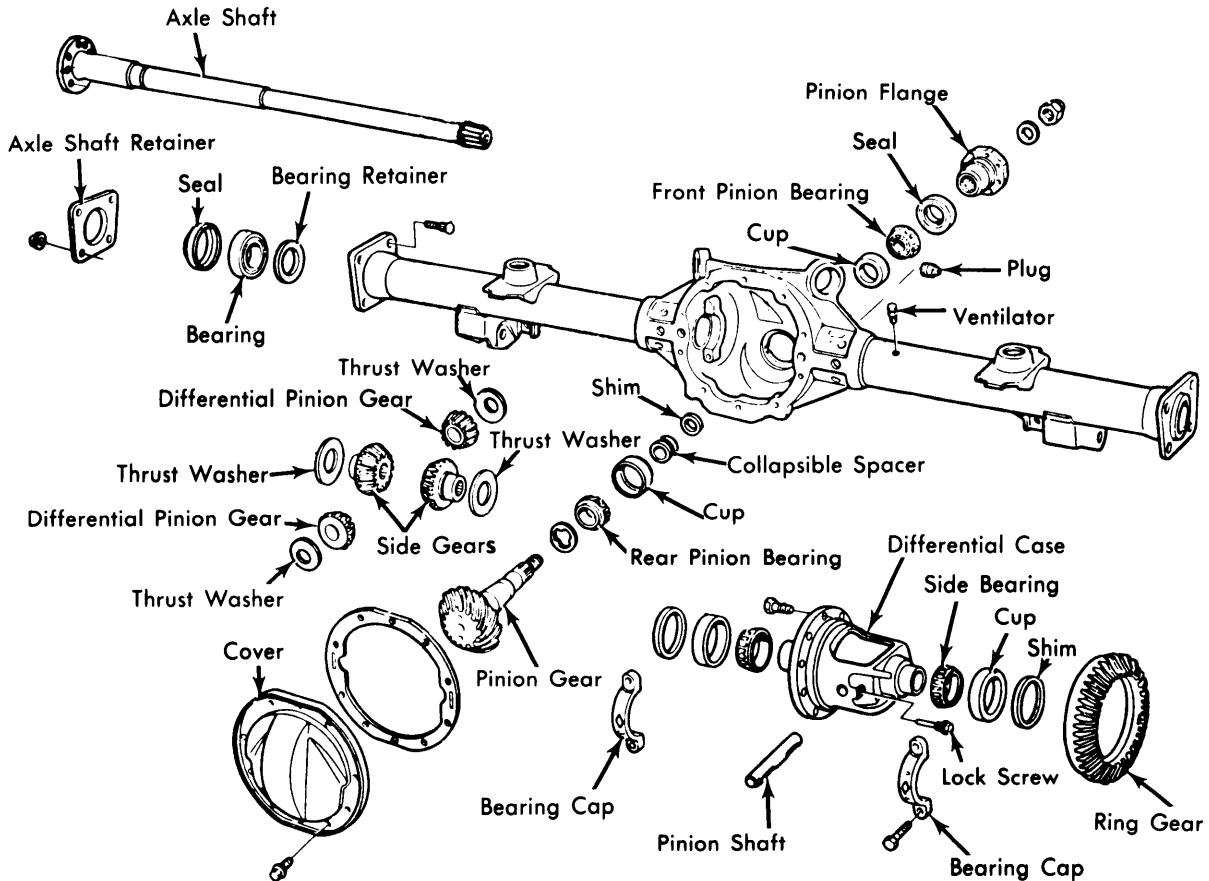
Exploded View of General Motors 8 1/2" & 8 7/8" Ring Gear Axle Assembly
